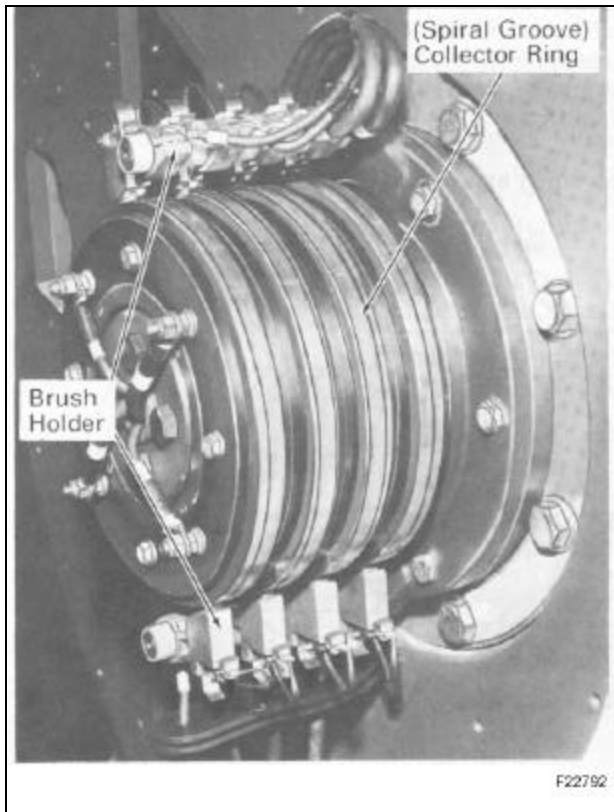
Typical AC Generator/CA Brush Holder and Collector Ring
